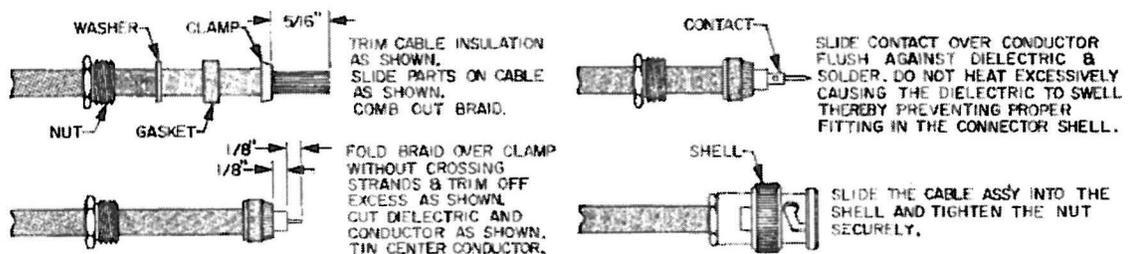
030-0005-00 CONNECTOR ASSEMBLY
